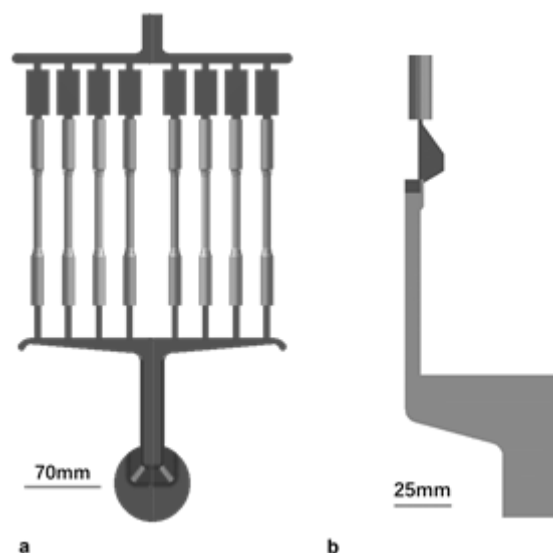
Die geometry used to produce ASTM standard tensile specimens [3]. (a) Front view. (b) Side view of runner-orifice system. The gauge length and gauge diameter of the tensile specimens are 50 mm and 6.35 mm, respectively.
